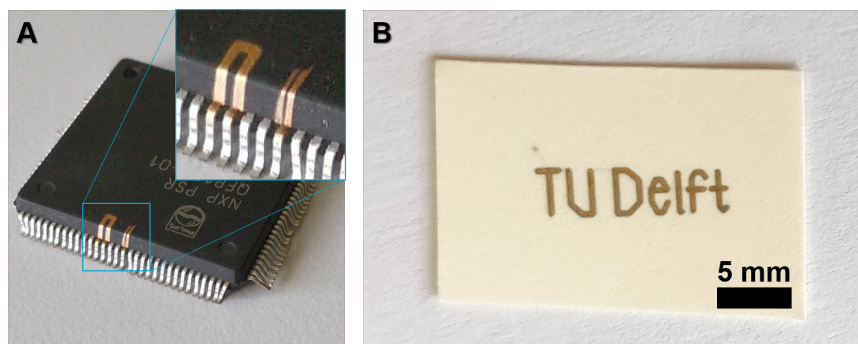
Printed structures made by spark ablation and impaction printing. A) Au lines printed on a packaged chip. B) 'TU Delft' printed on paper.
